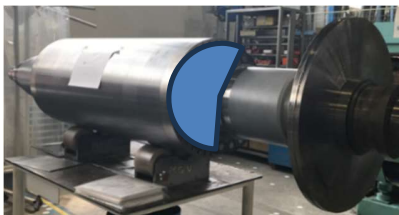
Laminated squirrel cage high-speed rotor with AMB bearings parts
